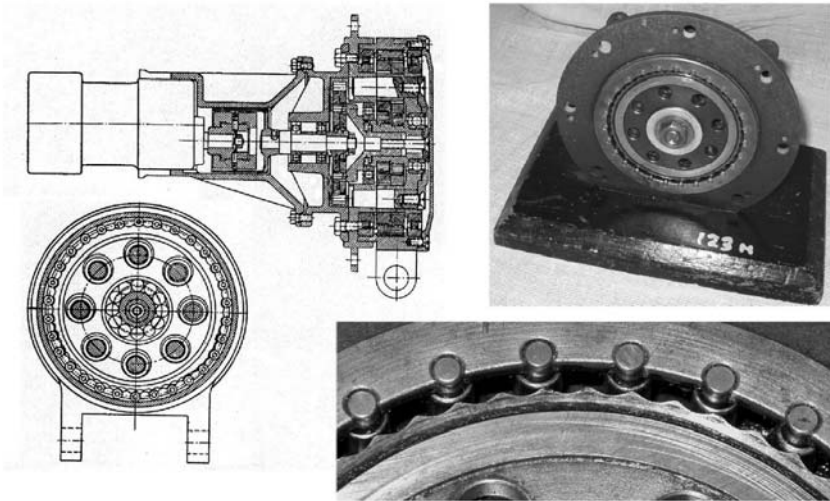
Model of a crank-planetary reducer with trundle gearing (the chassis of a Fokke-Woolf plane reducer)
